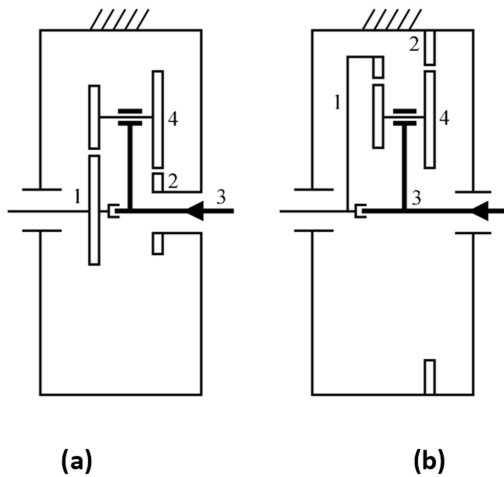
Construction solutions for four-member planetary gear trains. (a) External gears. (b) Internal gears.
